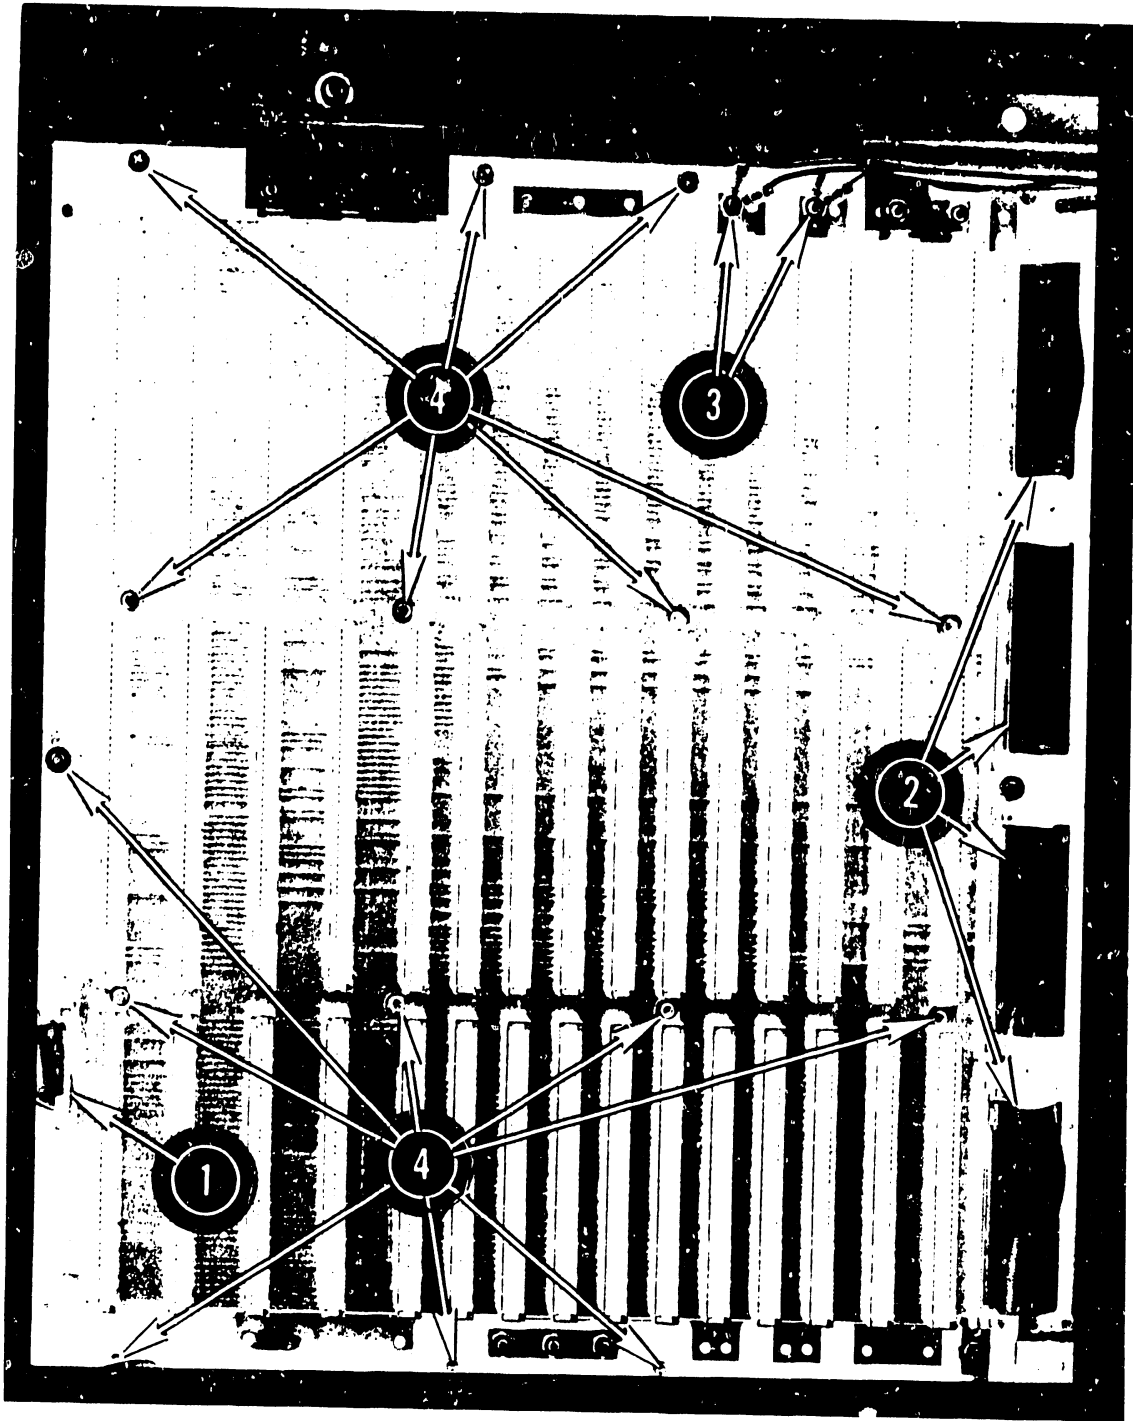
CP MOTHERBOARD REMOVAL
